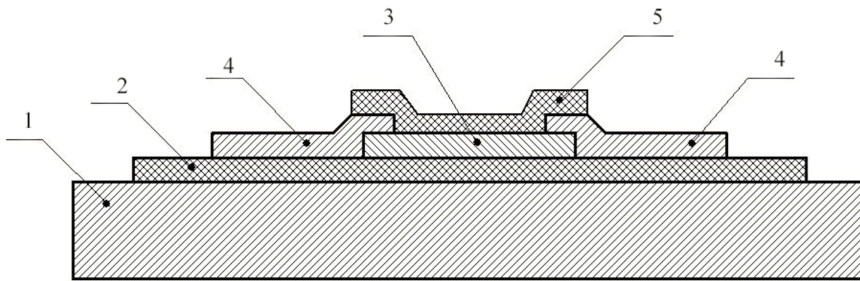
Scheme of the resistance strain gauge: 1–blade, 2–isolating layer, 3–strain gauge element, 4–contact platforms, 5–sheeting
